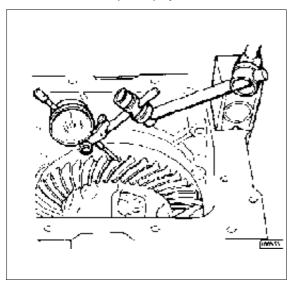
Checking backlash between bevel pinion and ring gear teeth.
